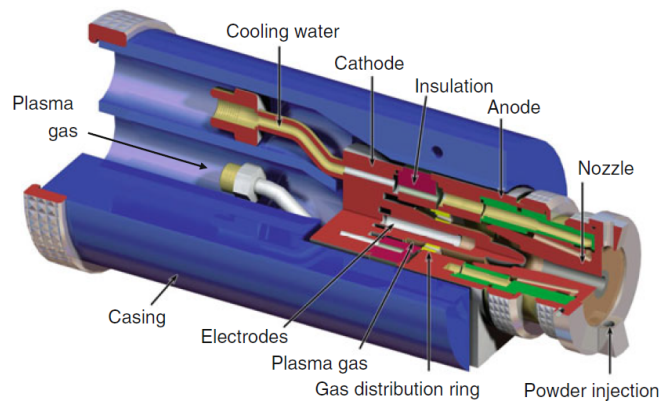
Schematic CAD drawing of F4 plasma gun interior [18]
